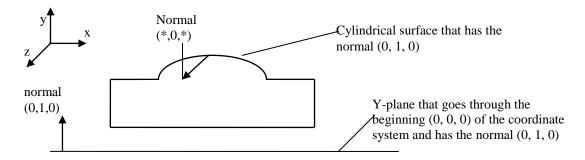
Cross section by Z-plane through a part with the curved top machining
